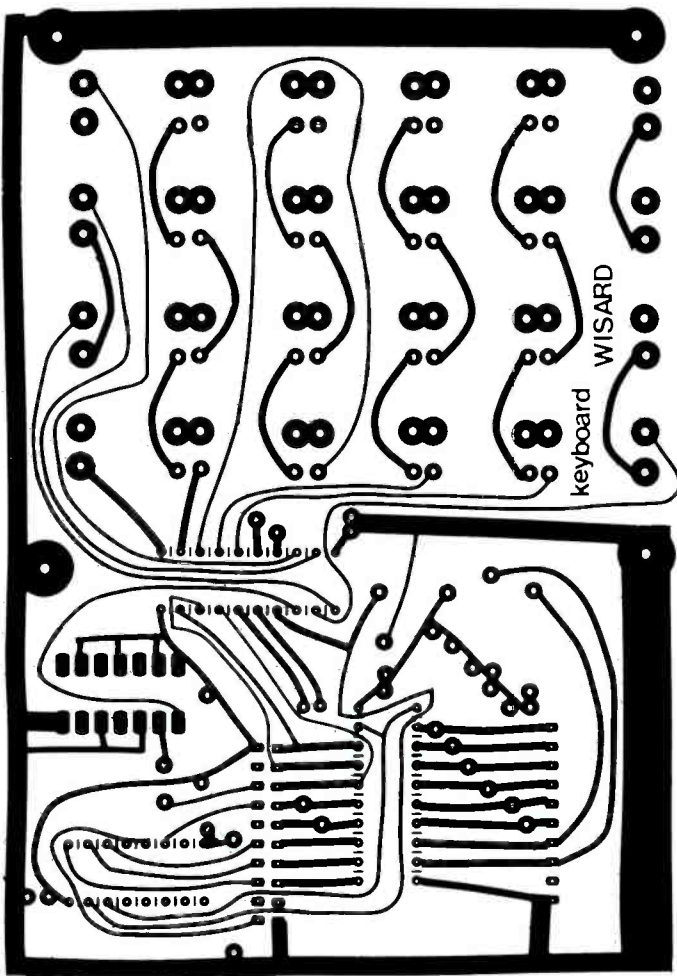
Actual-size etching-and-drilling guide for Keyboard module printed-circuit board.
